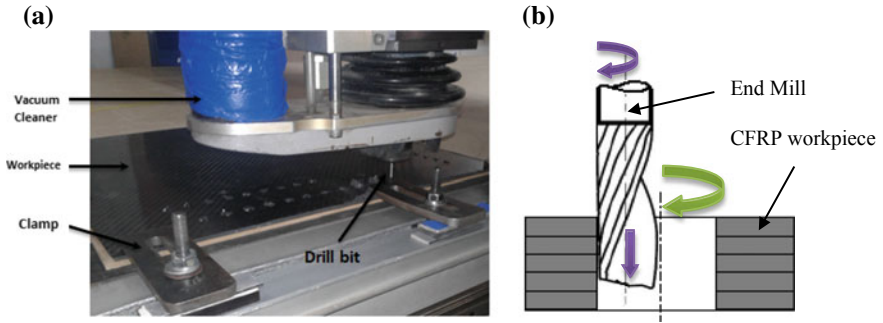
Experimental setup a CNC machine; b Tool motion in orbital drilling
